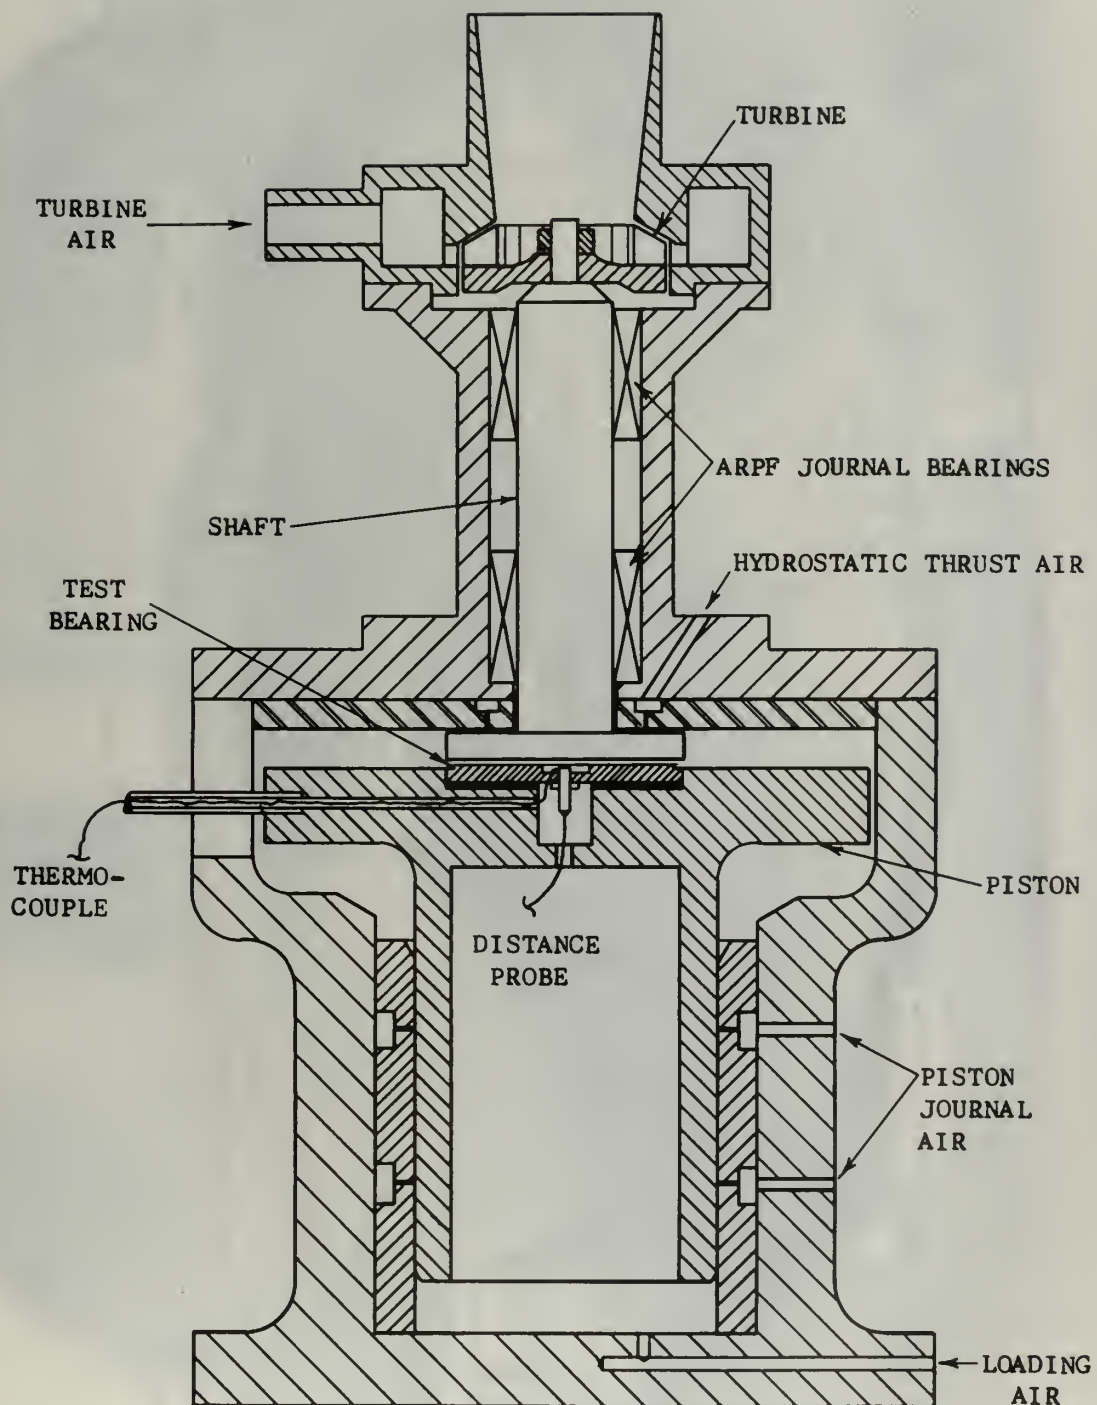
MAJOR COMPONENTS OF THRUST BEARING TEST RIG
